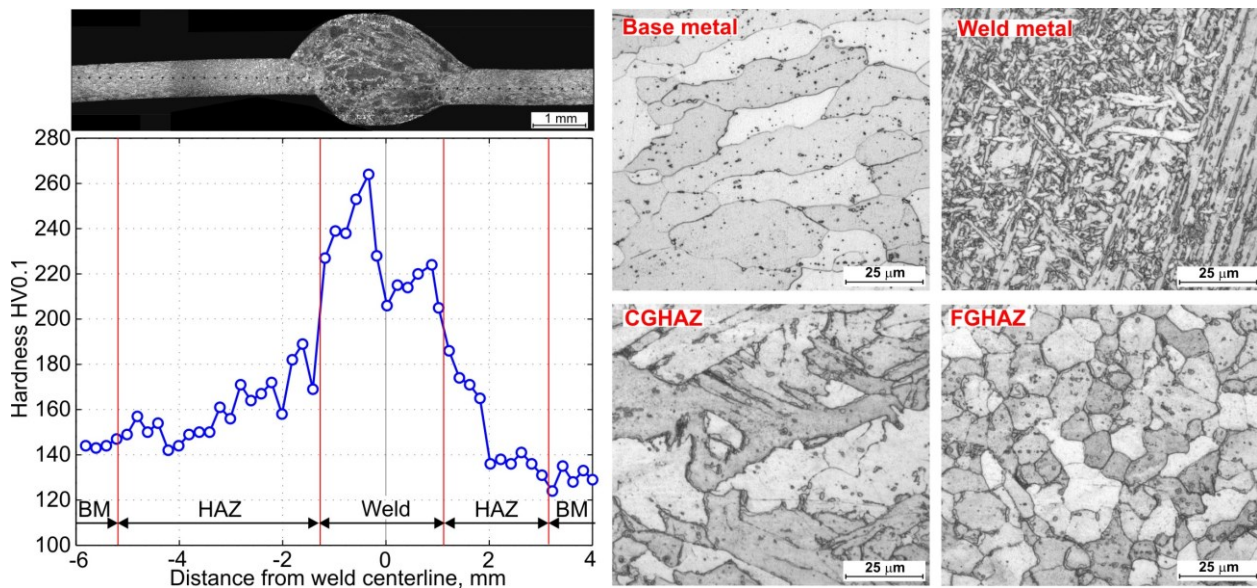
Overview of GMA welded joint of structured sheet with thickness 0.7 mm.
